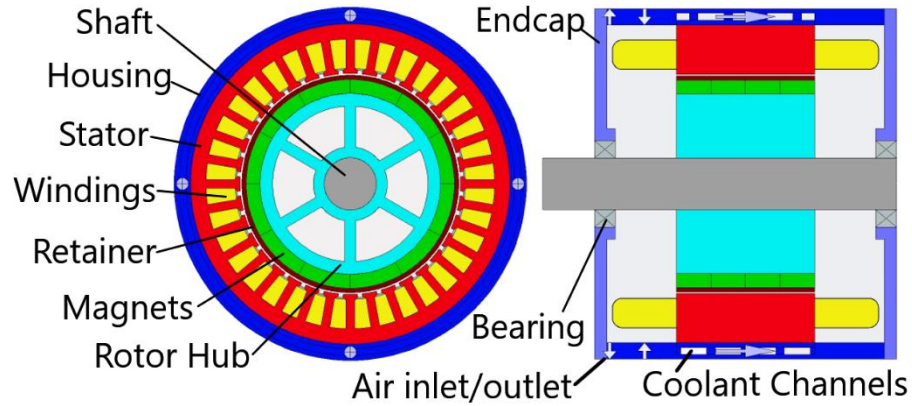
36/6 inner rotor configuration top view (left), side view (right)
